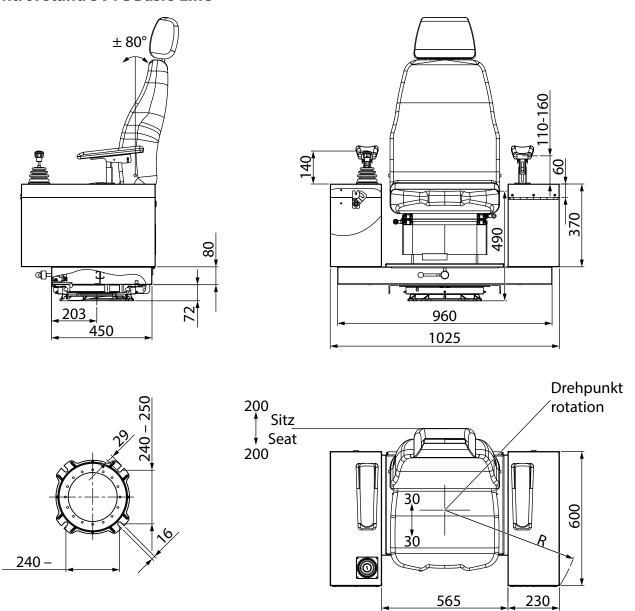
Control stand SV1C Basic-Line: Dimension drawing 1 (dimensions in mm)
